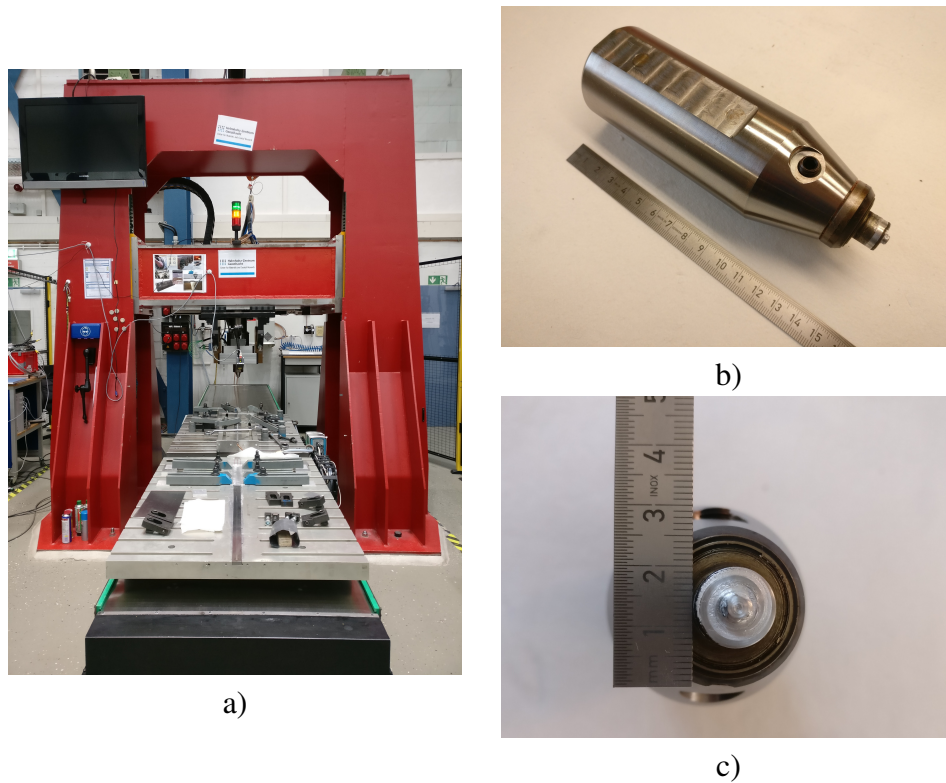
FSW portal system at HZG a) and tool set-up b), c) used for aluminum alloy AA2024-T3 welds.
